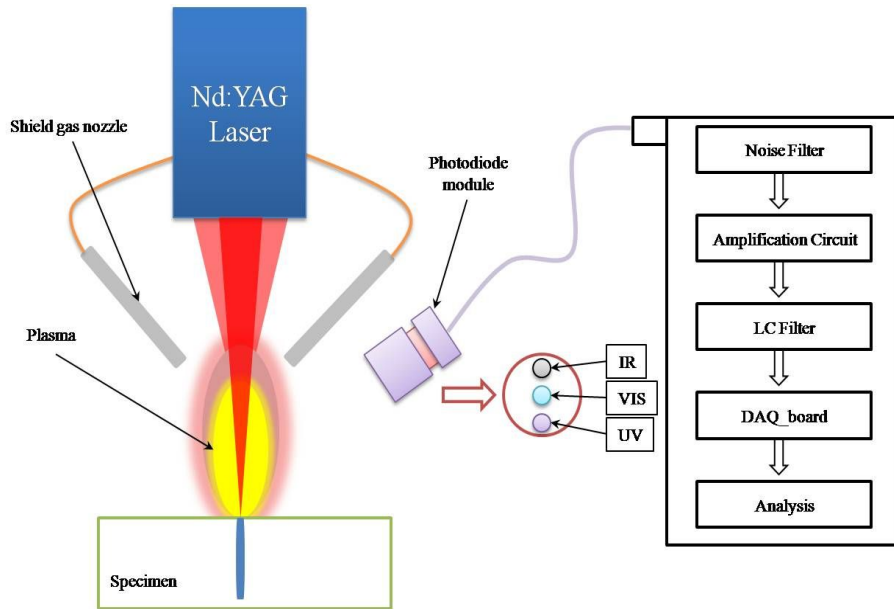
Experimental set-up of laser welding monitoring systems
